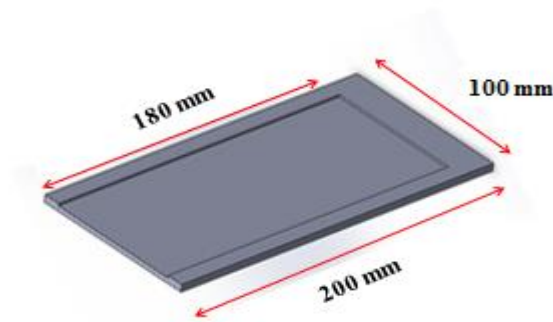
CAD model for aluminium plate machined for TEG module attachments
